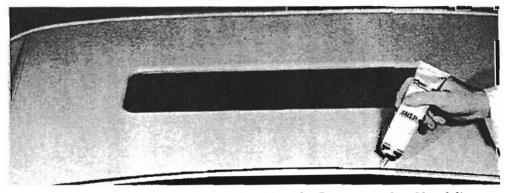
Insert the Sealer Tube Nozzle Between the Moulding and the Body and Apply Sealer.
